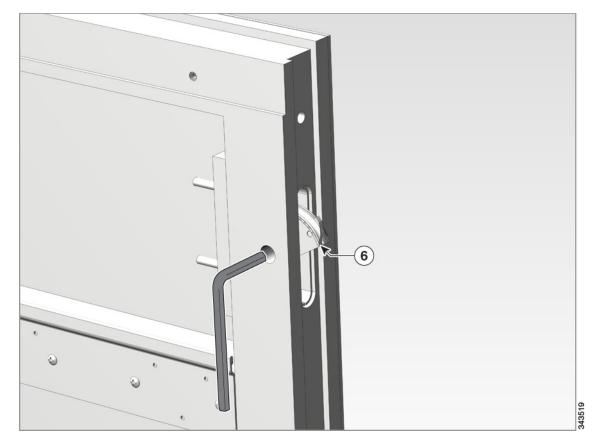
Installing the Wall Frames: Part 3 of 3—Using the Cam Locks to Join the Wall Panels
